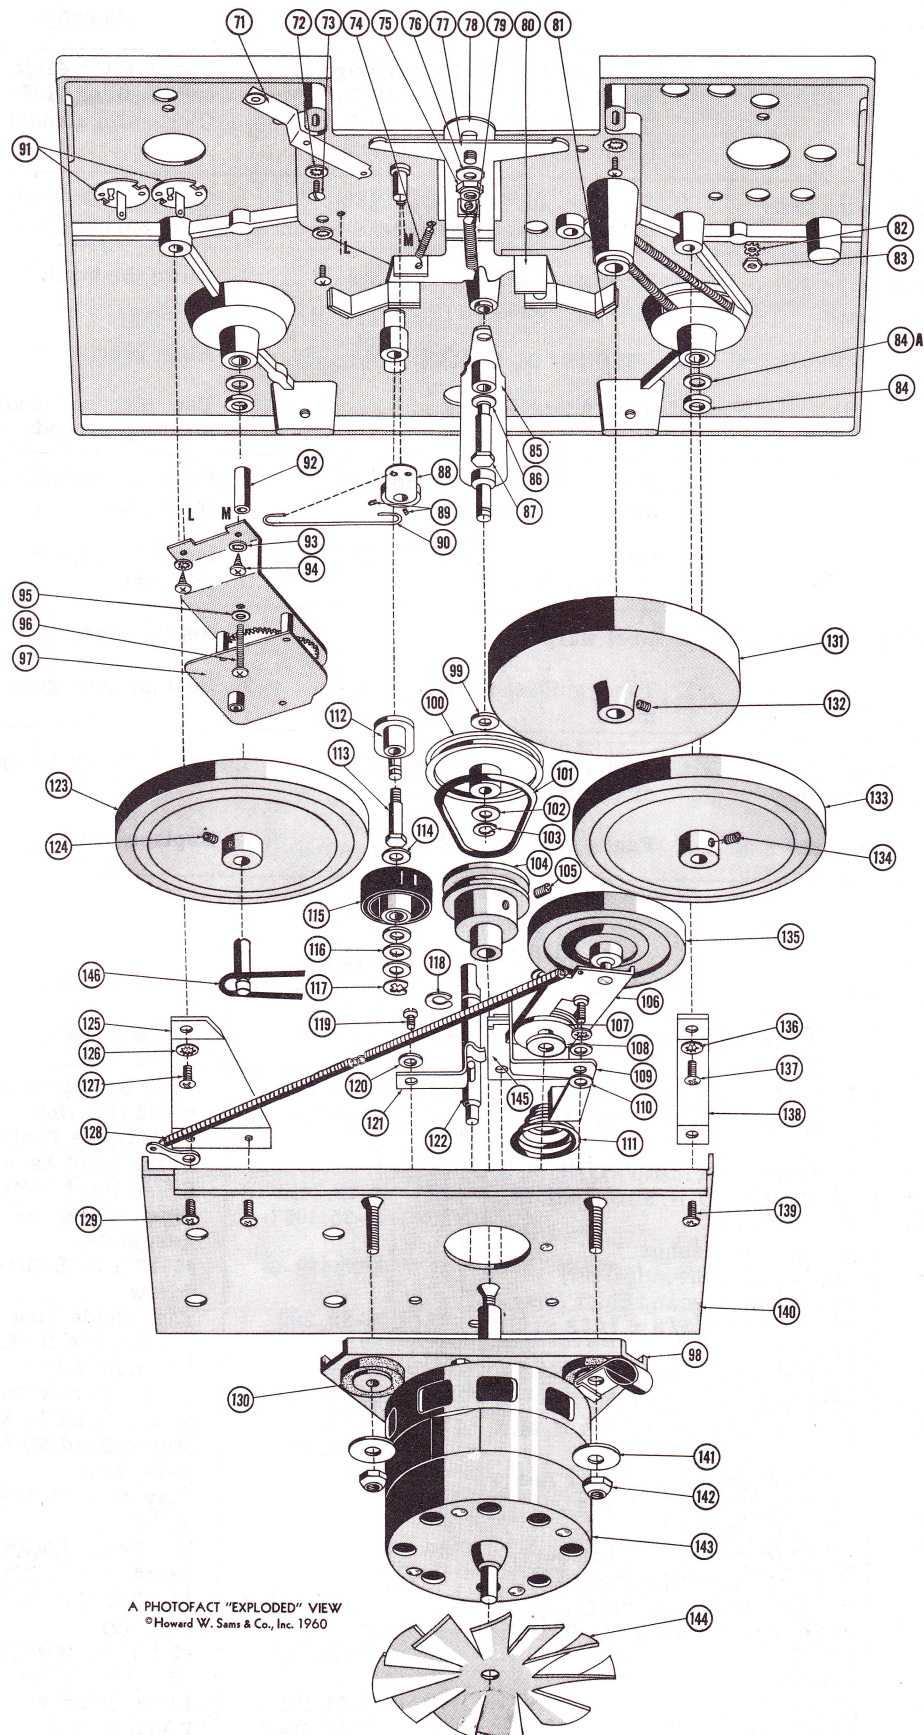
B EXPLODED VIEW OF PARTS BELOW BASEPLATE
